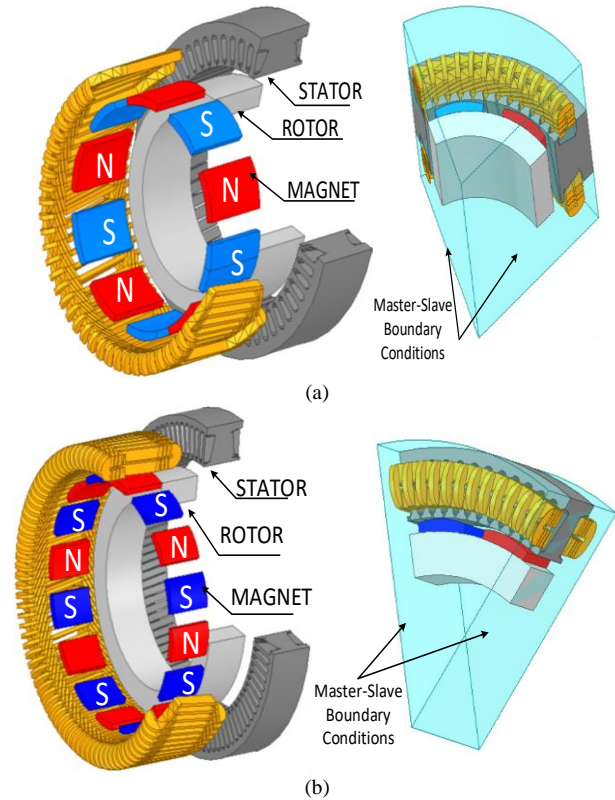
Exploded view of the generators, a) Design A, b) Design B
